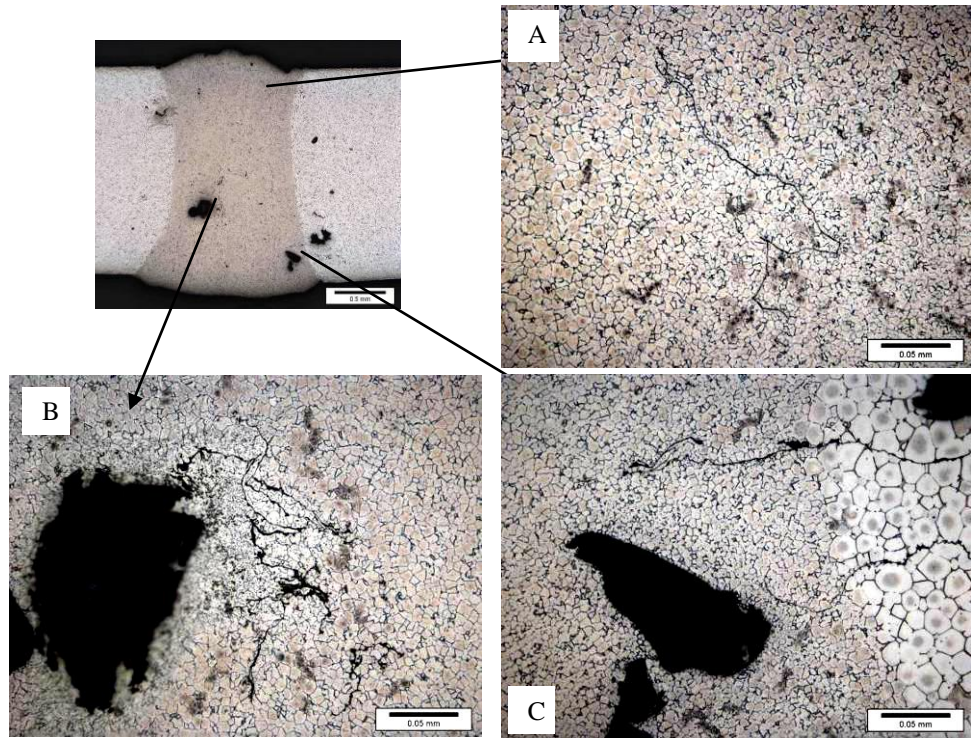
Solidification Cracks in The Sample Welded at 0.1 mm gap – Middle Section
